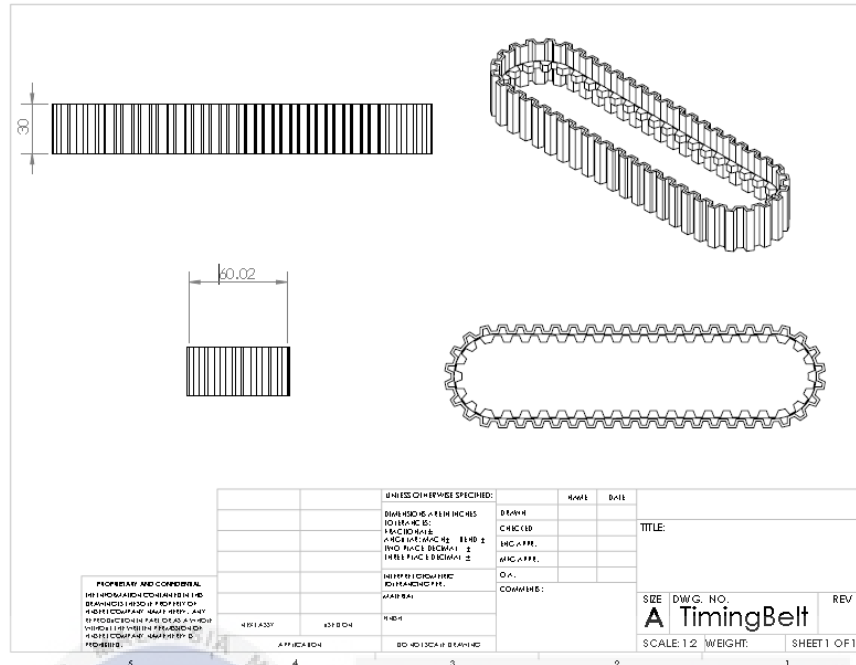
Plan CAD drawing for timing belt of air duct robot
